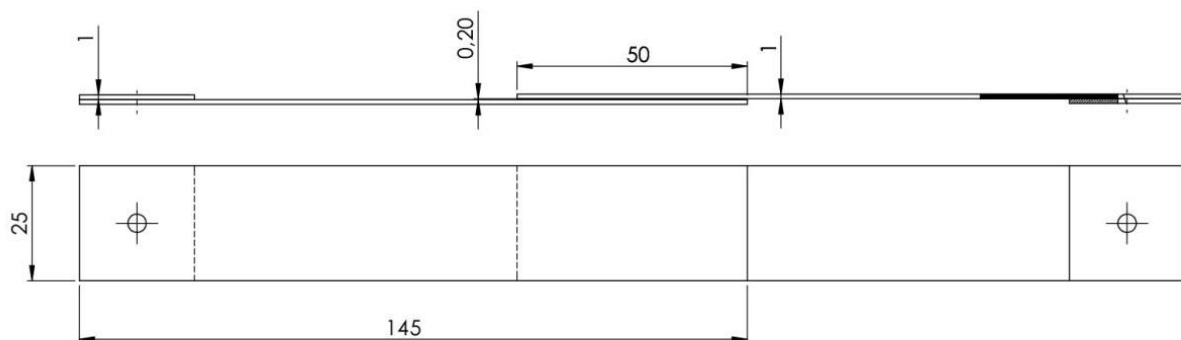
Geometry of the SLJ used for the impact tests (dimensions in mm).
